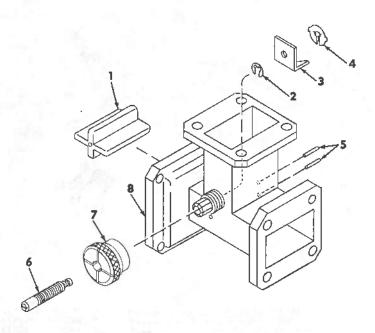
DUPLEXER /9159973/-PARTIAL EXPLODED VIEW
